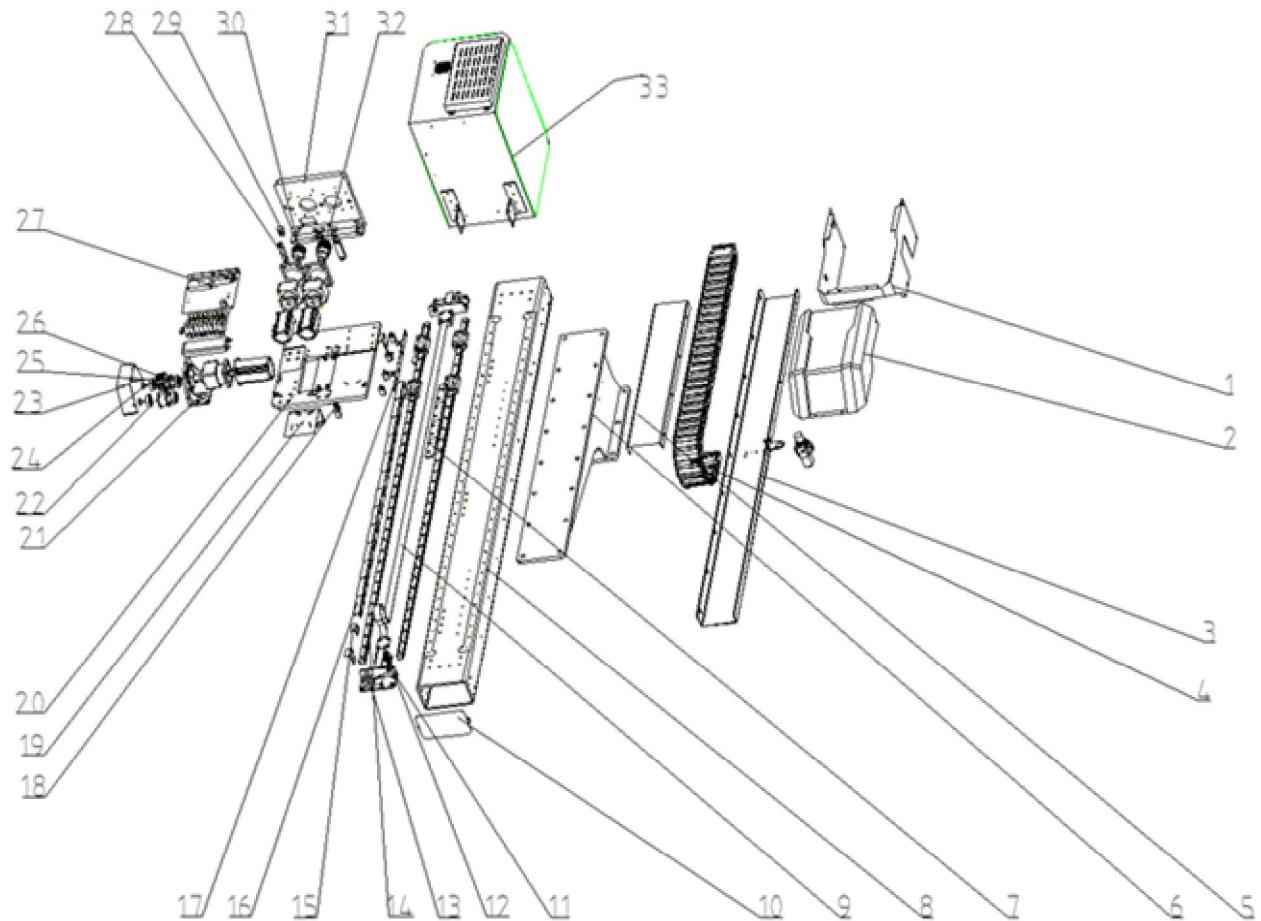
ST3 & ST3-T traverse unit (small model) exploded view
